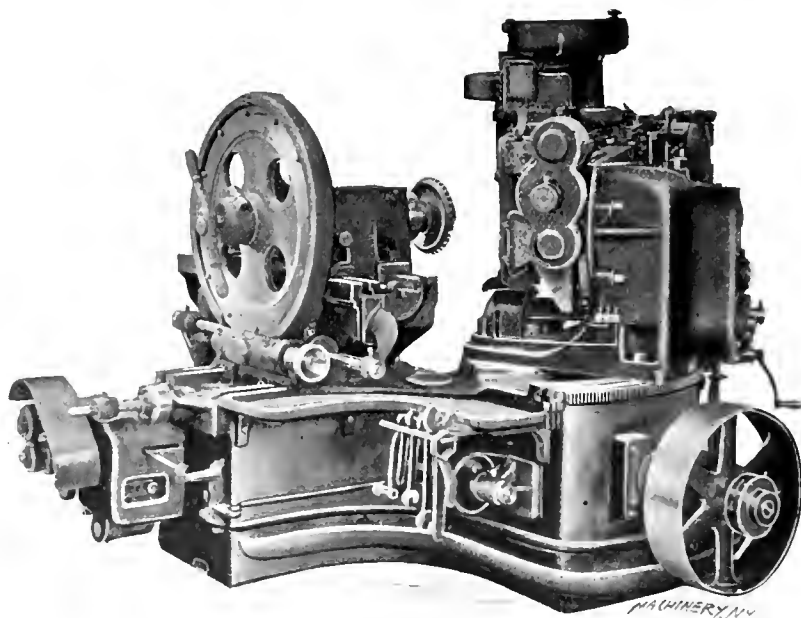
Rear View of the Universal Automatic Gear-cutting Machine.
